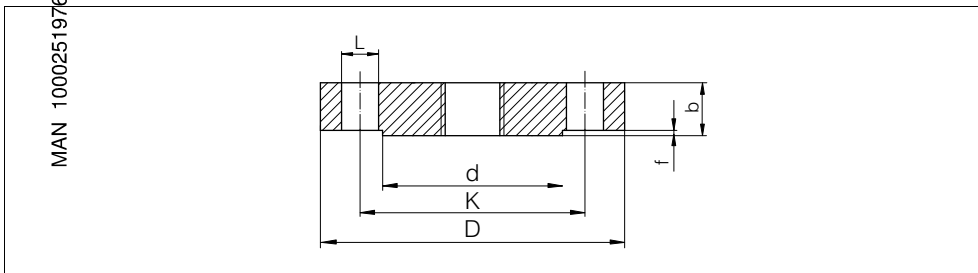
Dimensions - ASME flange B 16.5 (seal ledge RF)
